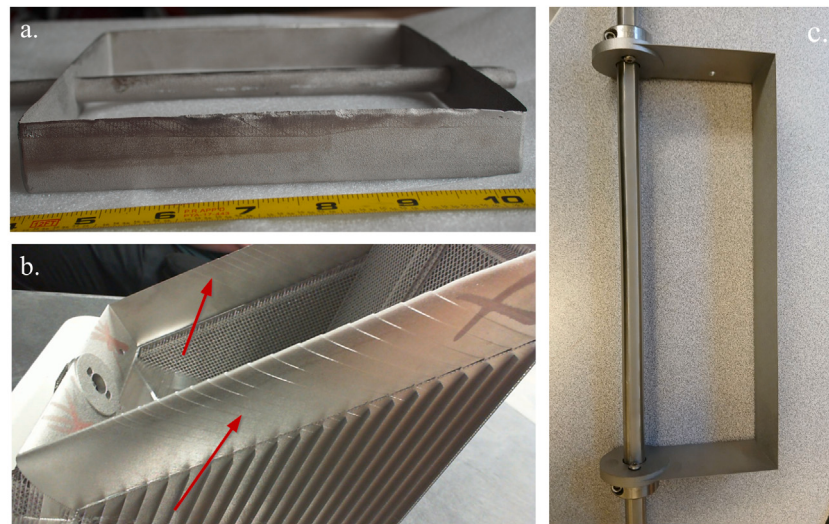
Examples of test metal prints: (a.) melting and warping, (b.) shift lines on a prototype part, (c.) successful one-bladed print.
